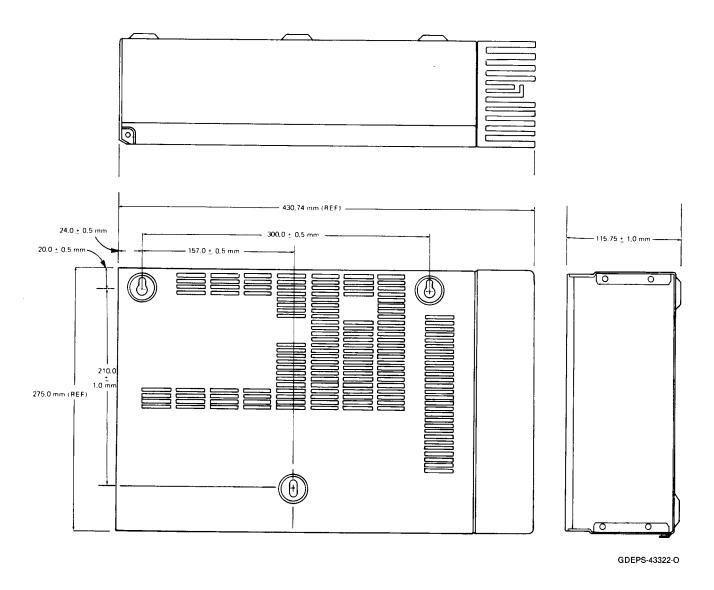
Station Mounting Dimensional Detail (BOTTOM VIEW)
